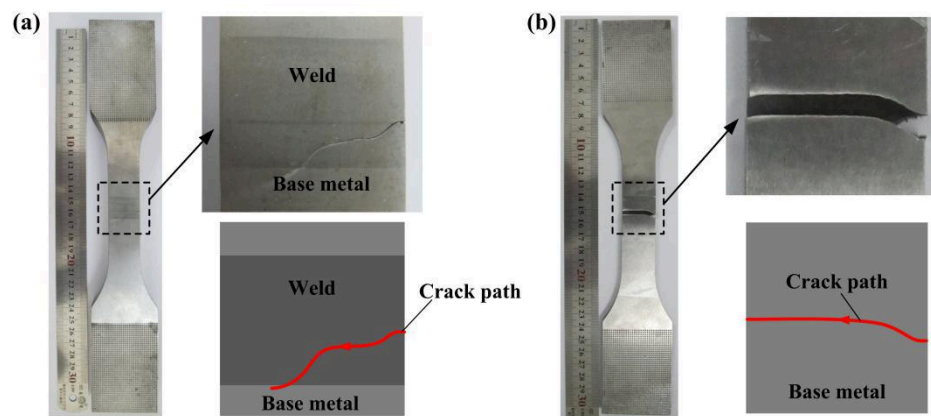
Fatigue crack path of: (a) Welded joint and (b) Base metal.
